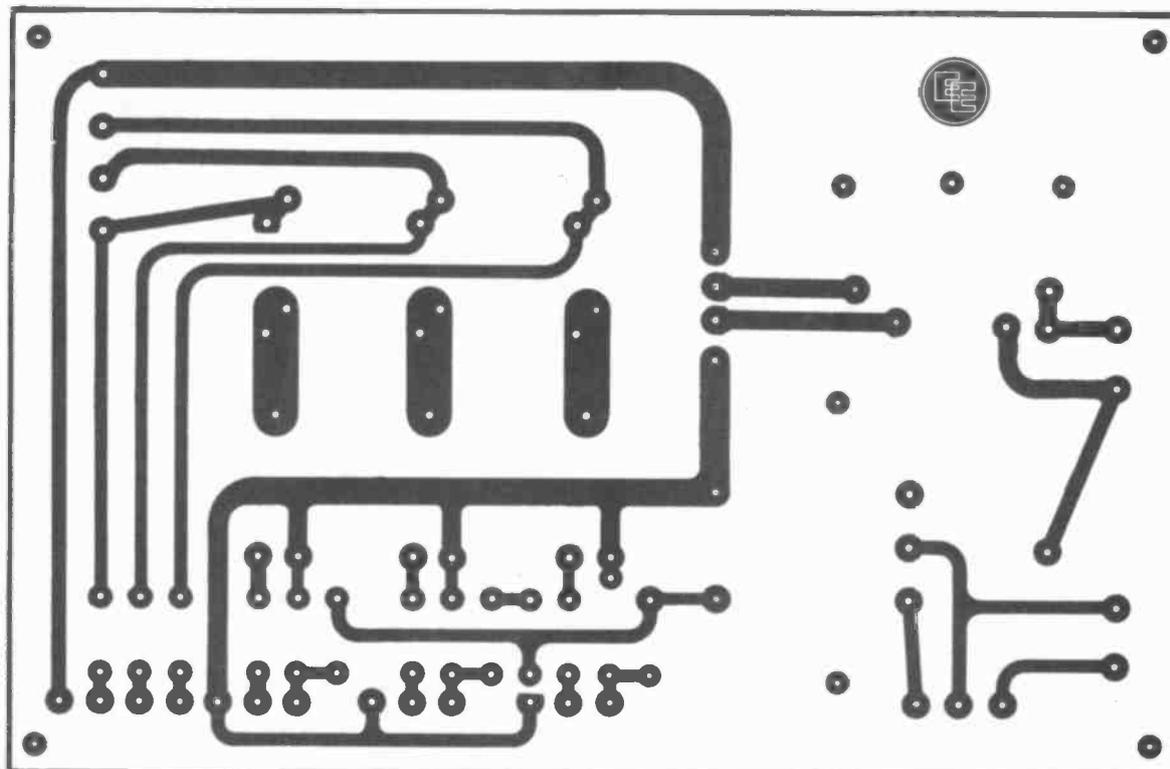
The foil pattern for the p.c.b. This is reproduced full size.
